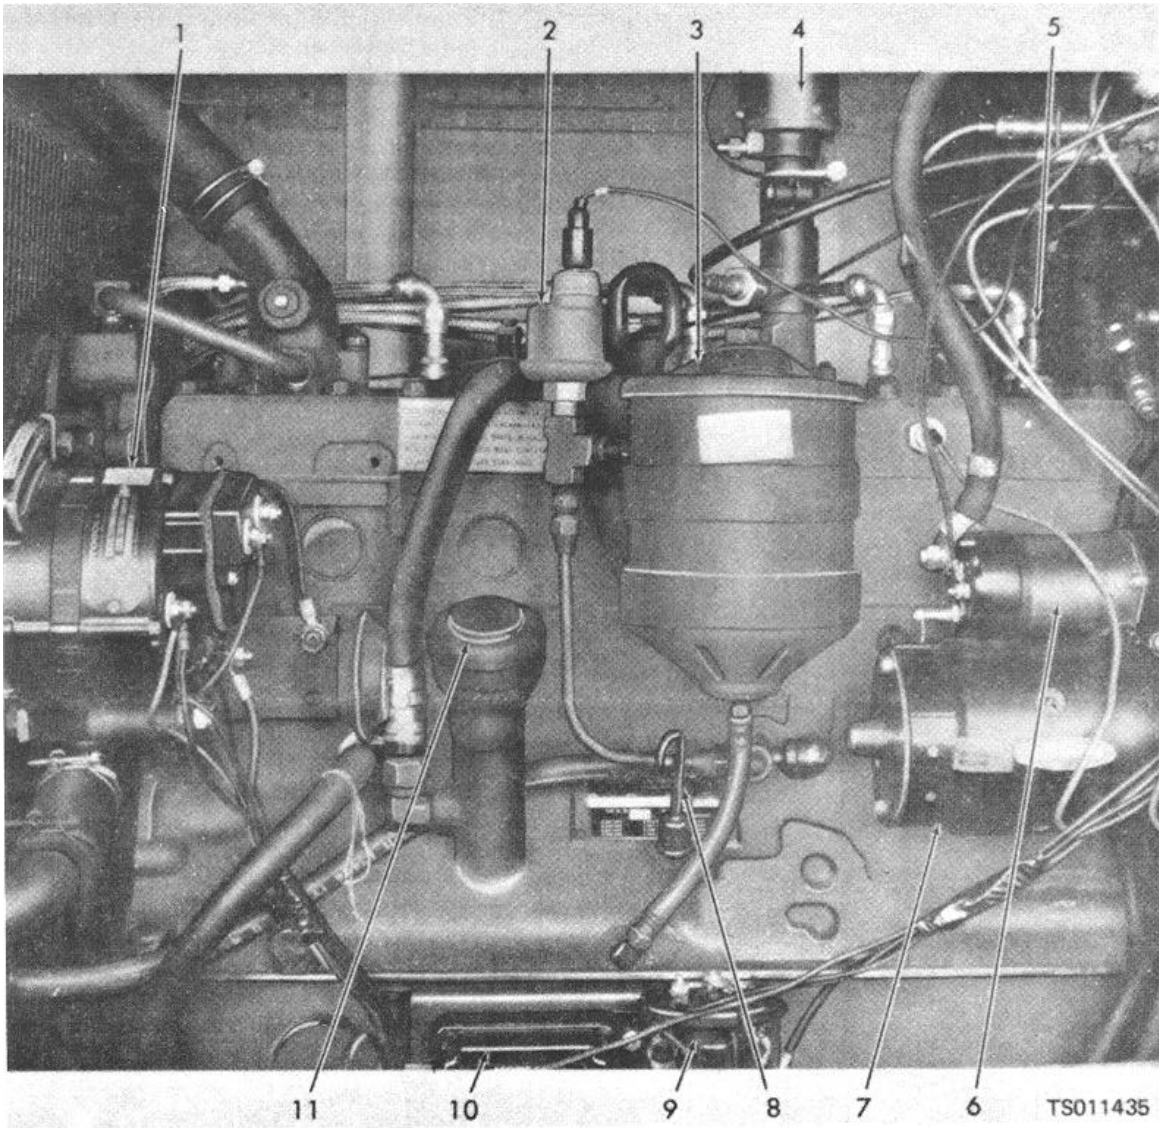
Left side of engine housing showing drains and battery charging receptacle.
